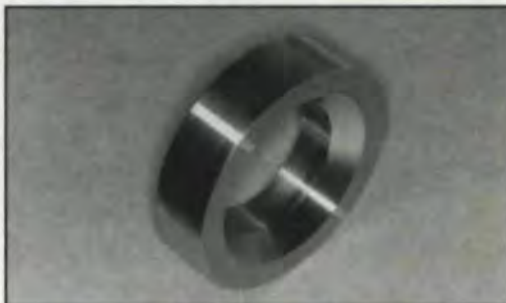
Alloy steel ring prepared for inertia welding with 45° conical bevel.
